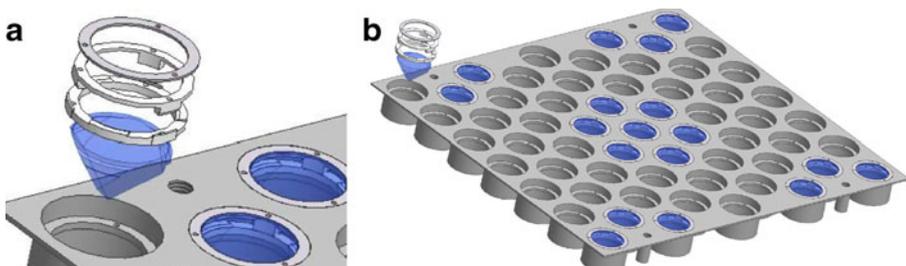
Sketches of CCR-A: a exploded view of the CCR showing the aluminum and Poly-ChloroTriFluoroEthylene (KEL-F) assembly rings; b full array
